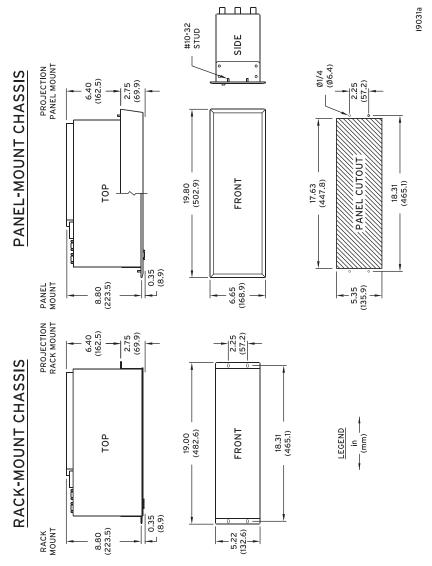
SEL-387L Dimensions and Panel-Mount Cutout
